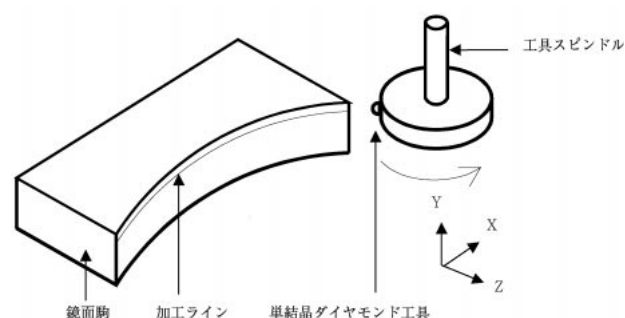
Schematic image of machining process by 3-Axis Ultraprecision Machine.
